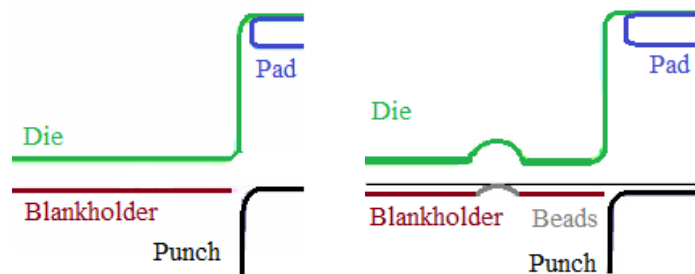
Section cuts of tools in initial position: a) without beads and b) with smooth beads (bead height = 3.6 mm) [63].
